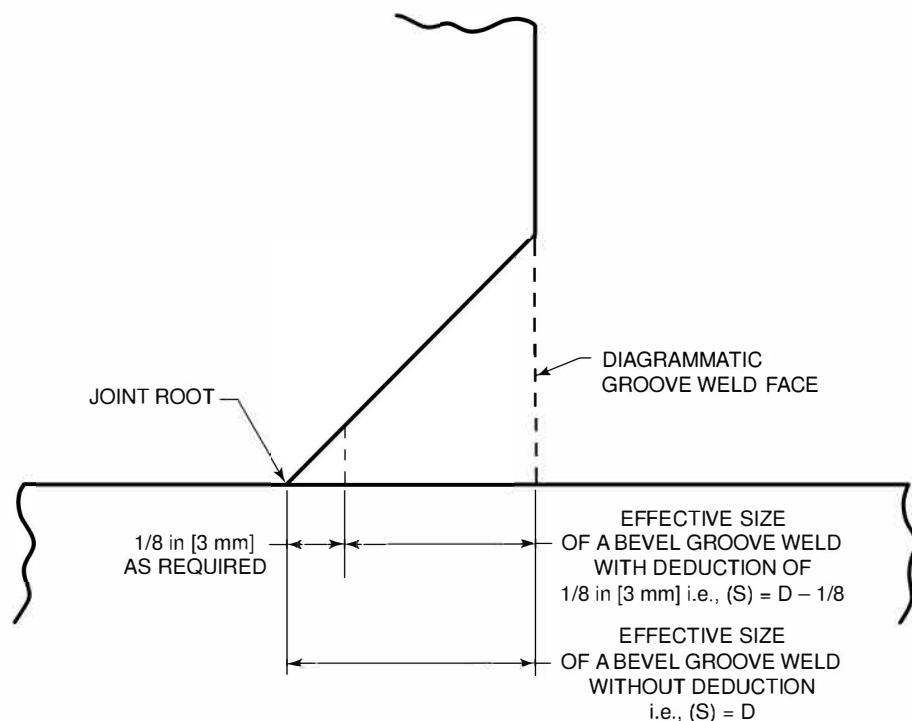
Unreinforced Bevel Groove Weld (see 4.4.2.7)
